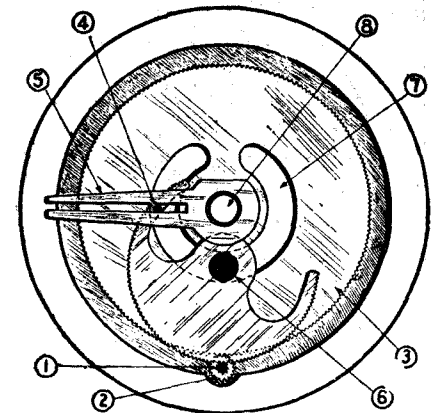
In this dial pinion 2 rotates plate 3, which carries the calibration scale. Pinion 1 moves the sector about the centre 6. Pin 4, fastened on sector, thus changes its radius in arm 5. The smaller the radius the faster arm 5 revolves about 8, which carries the condenser spindle.
